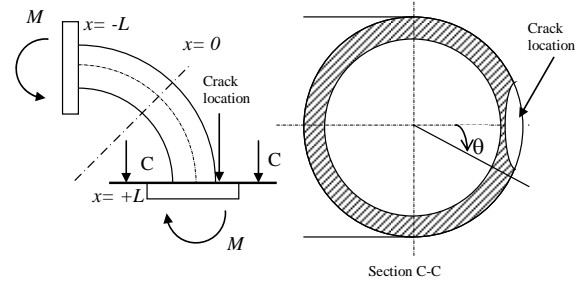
Part-through crack in a welded flange joint in a curved pipe
